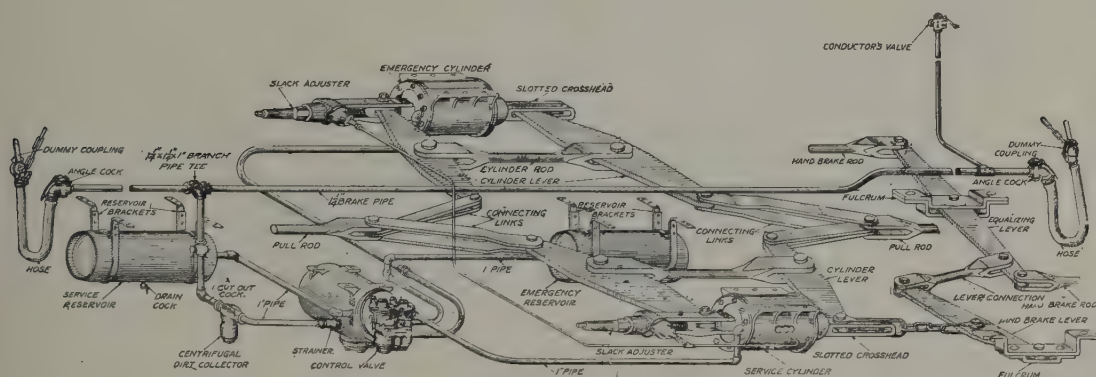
P C Passenger Brake Equipment with Cylinders Pointing in the Same Direction.
